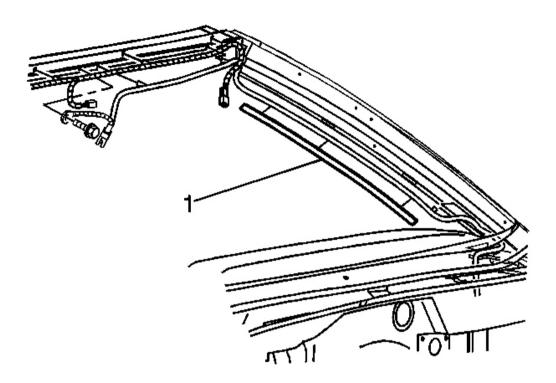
Coaxial Cable At Windshield Frame Courtesy of GENERAL MOTORS CORP.
